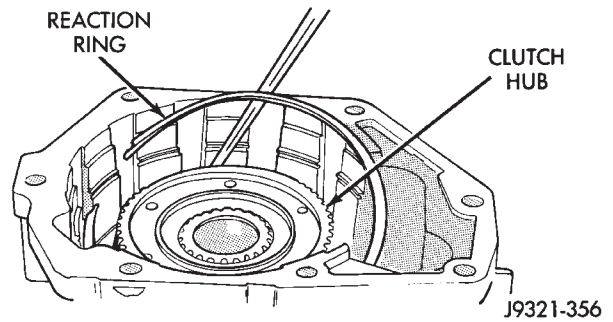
Overdrive Clutch Wave Spring Removal/Installation
